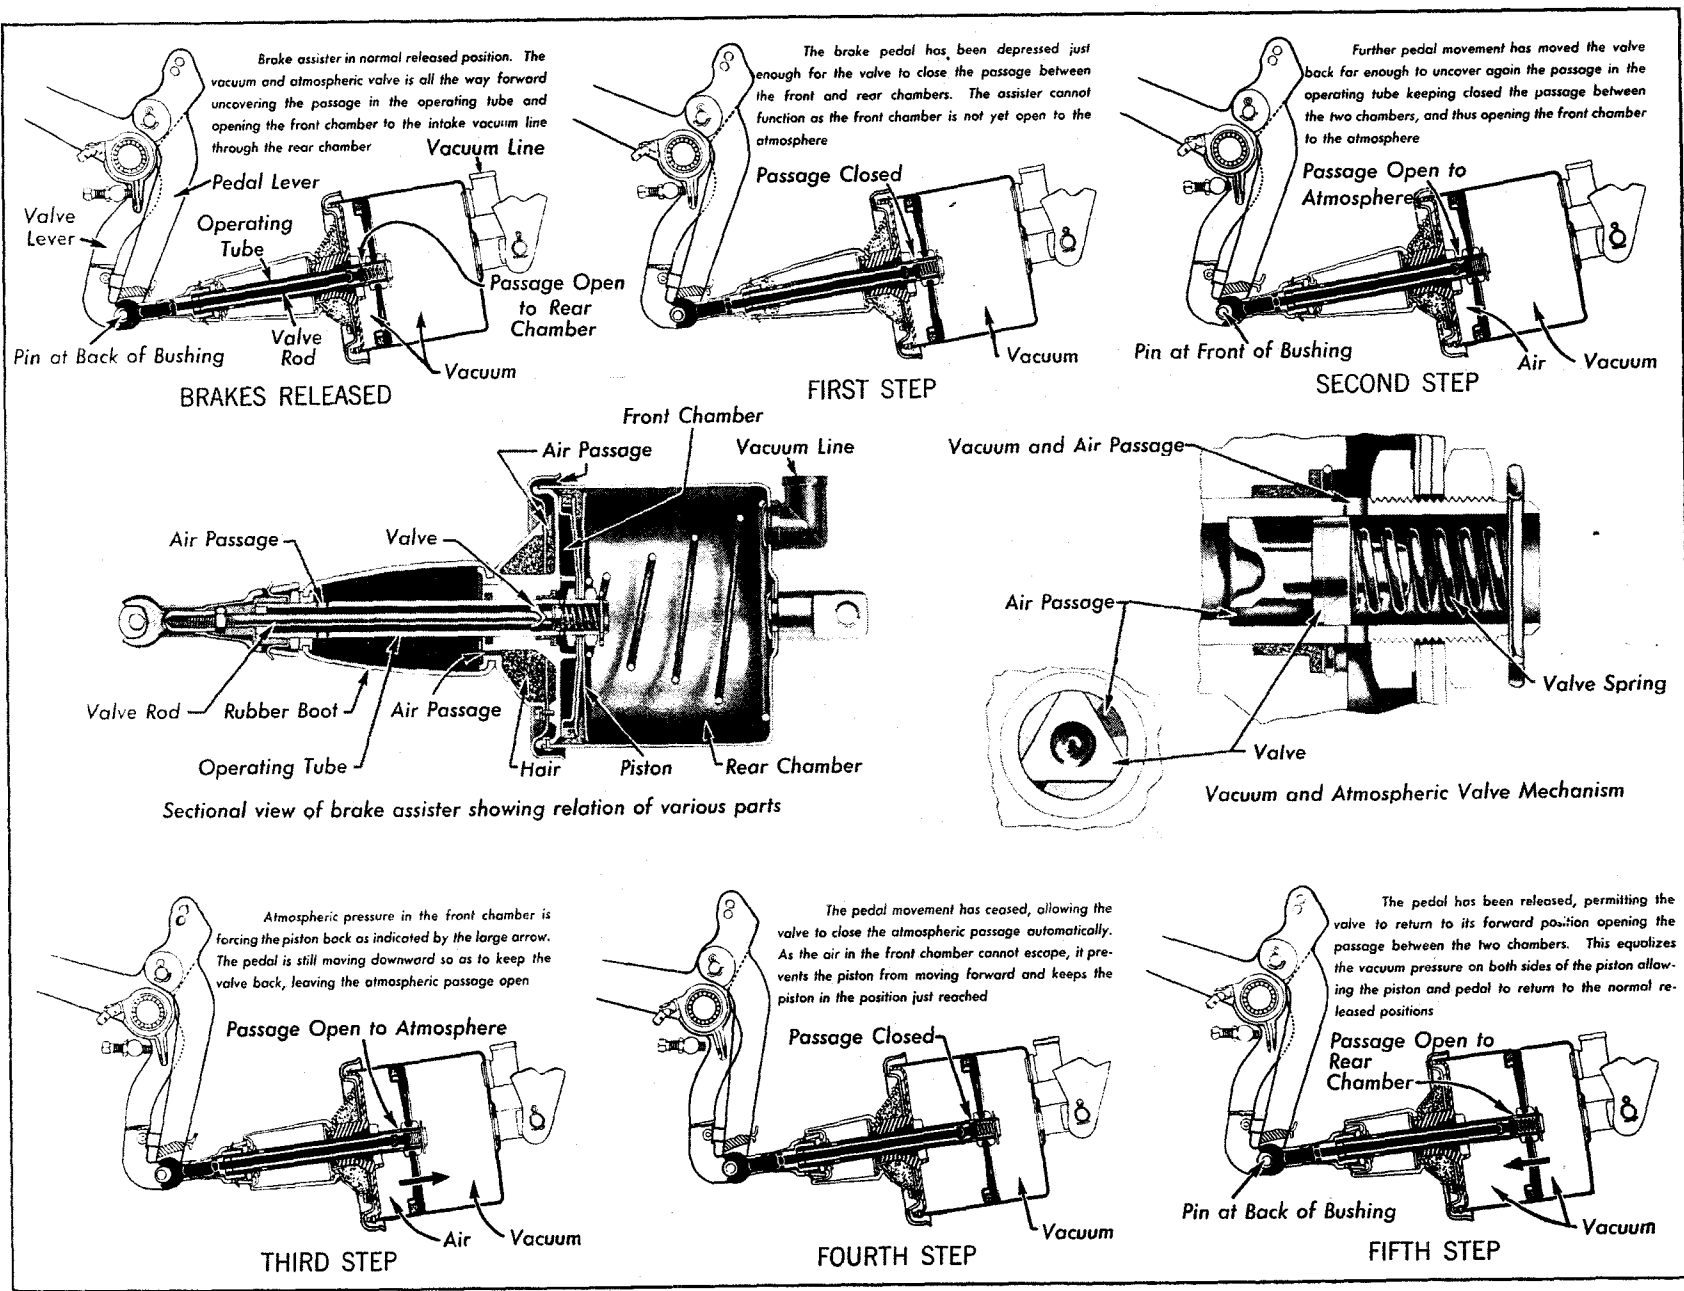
A. Diagrams Showing Operation of Vacuum Brake Assister—
